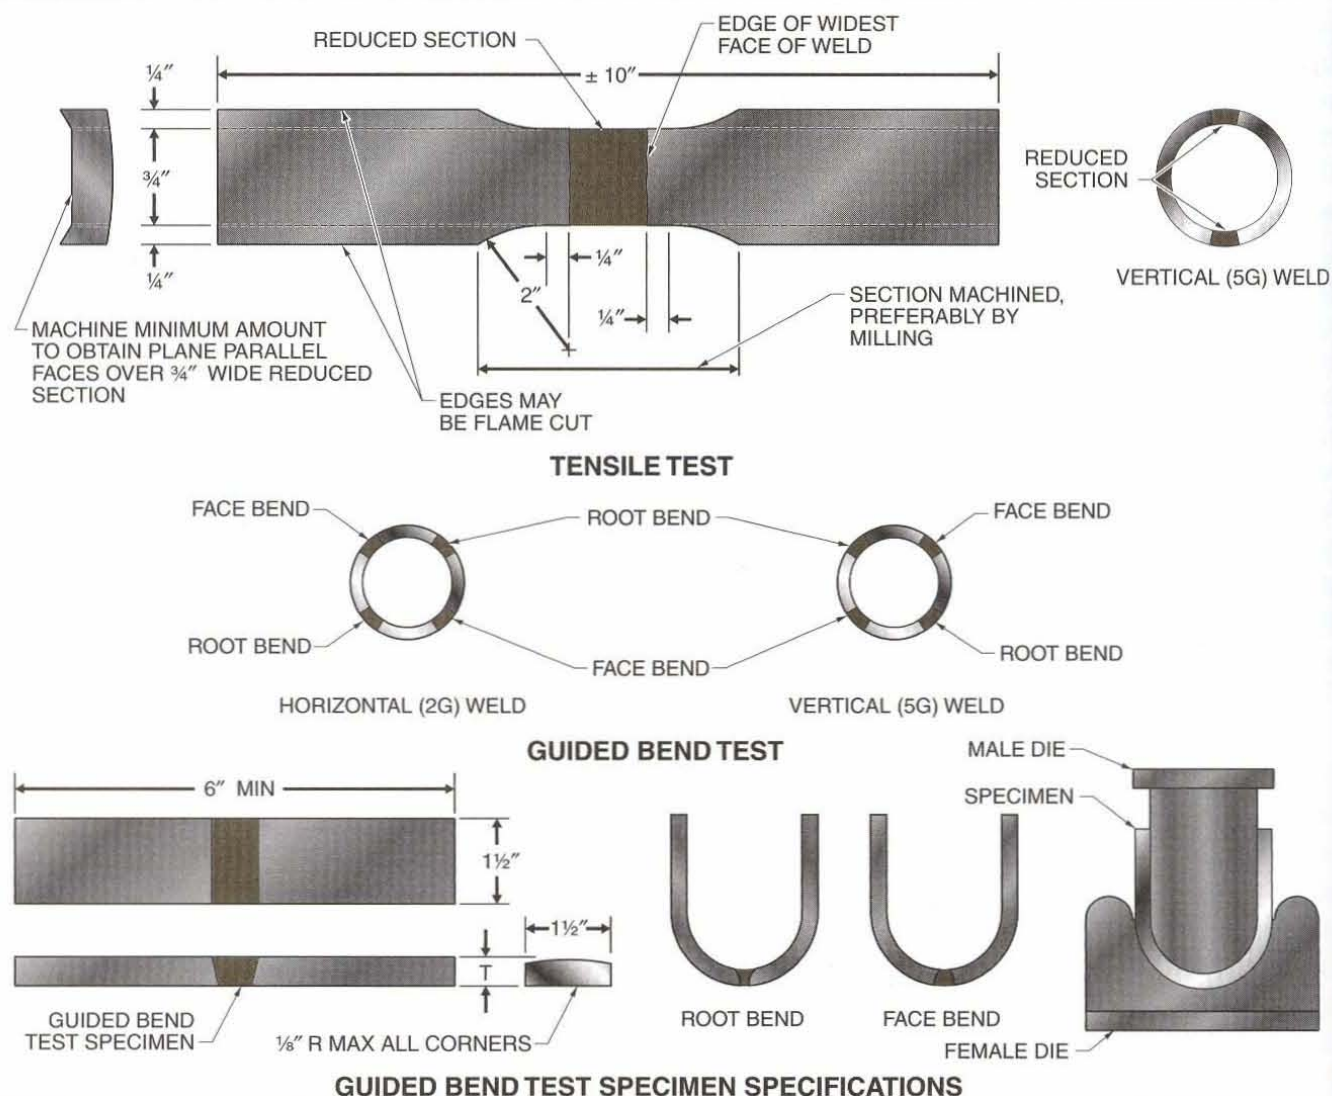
Tensile and guided bend tests are used for destructive testing of pipe welds.
